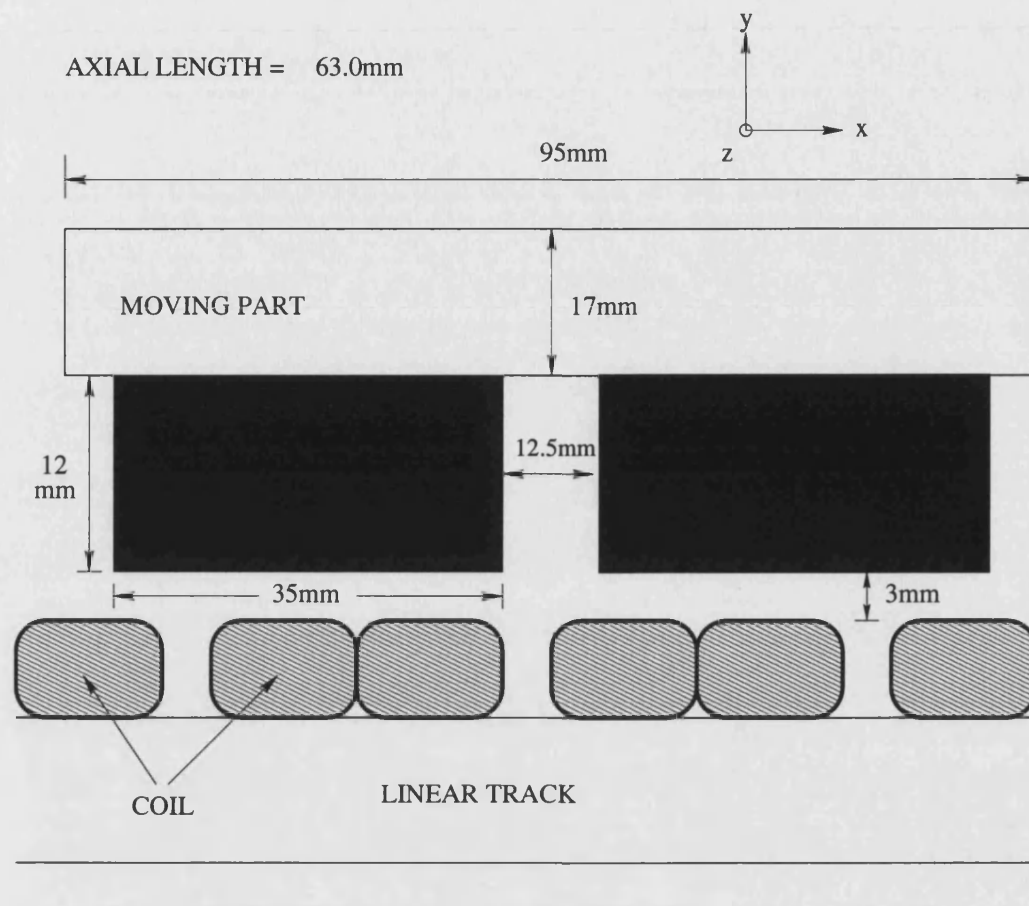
Schematic of linear PM machine and coil dimensions.
